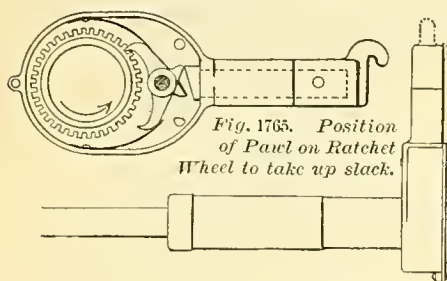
Position of Pawl on Ratchet Wheel to take up slack.
